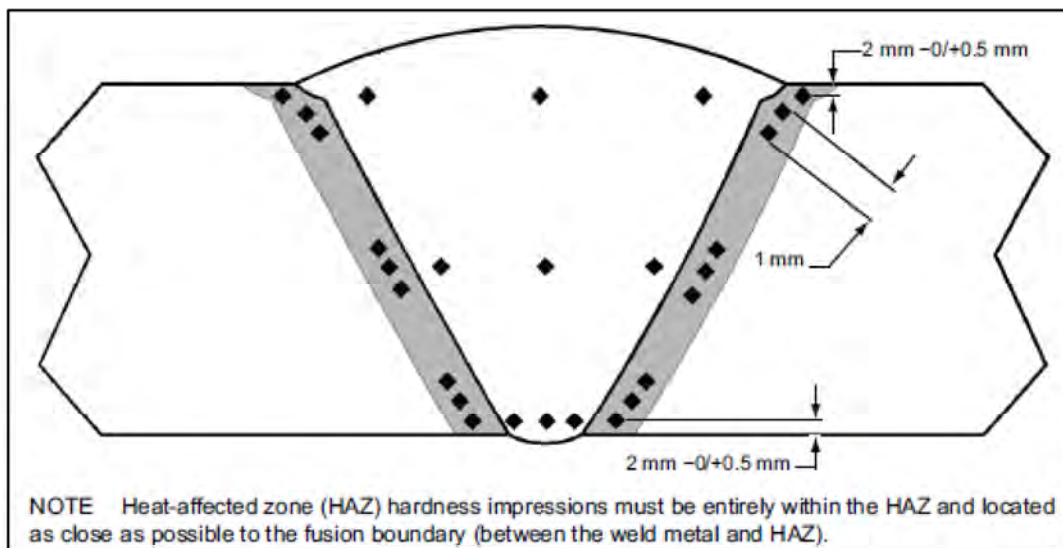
Hardness Indent Locations for a Full Thickness Centerline Repair Welding Procedure Qualification for Butt Weld Repairs
